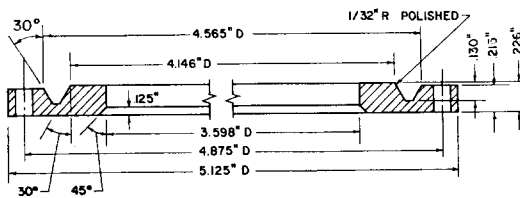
Section through the diameter of one clamp ring, showing dimensions which produced satisfactory stretching of foils. In upper clamp ring, drill clearance holes and counter bore for no. 6-32 Allen-head cap screws. Drill and tap no. 6-32 in lower clamp ring. Neoprene O-ring  $4\frac{1}{8}'' \times \frac{3}{8}''$  diam. X-sec.
